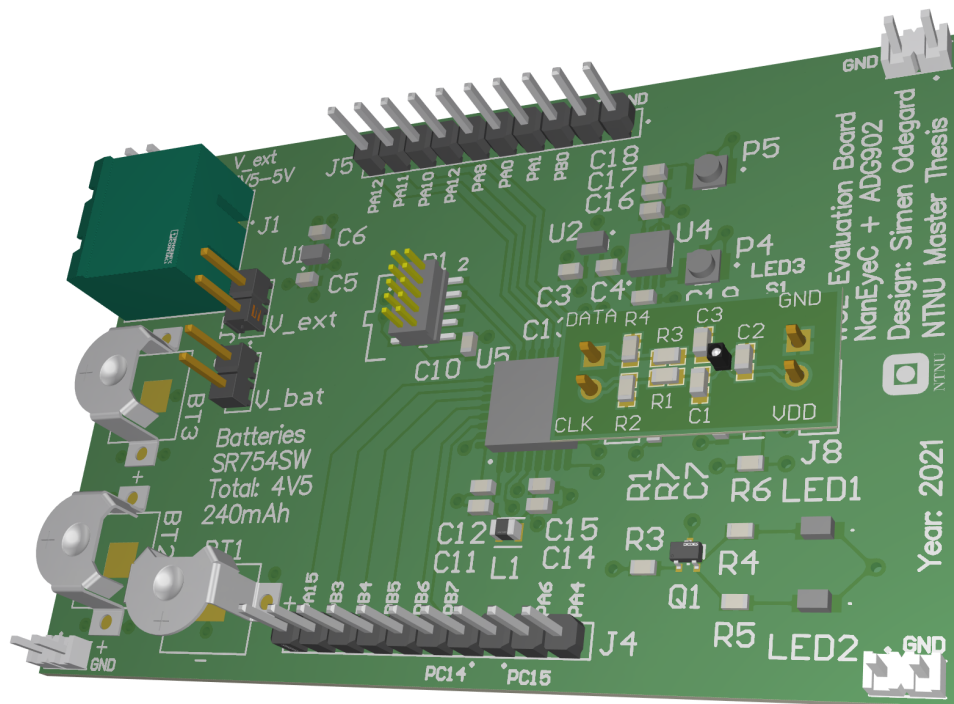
The NanEyeC breakout board mounted on top of the custom evaluation board as an extension module. Before this configuration can be used, the components between the two PCB headers on the custom evaluation board must be removed.
